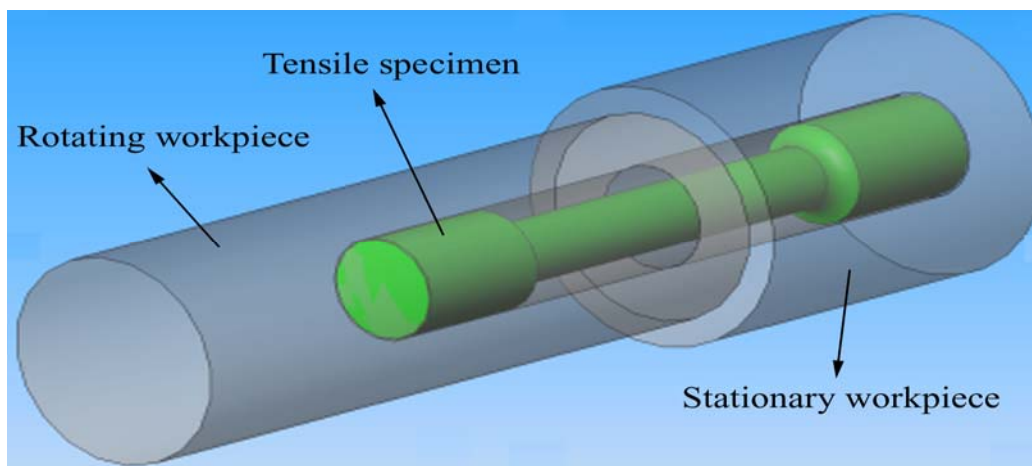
Location of the tensile specimen in the friction welding specimens.
